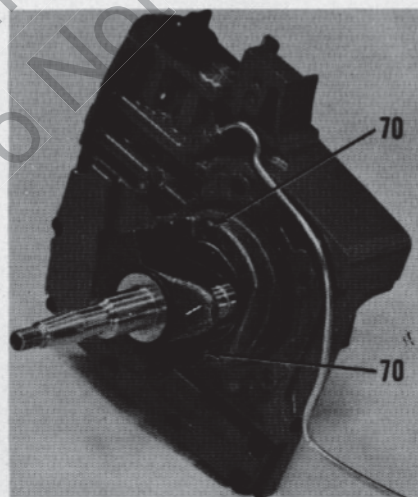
View showing crankcase removed from drive case and crankshaft on models equipped with ball bearing at drive end of crankshaft. To remove crankshaft from drivecase, bearing retaining screws (70) must first be removed.
